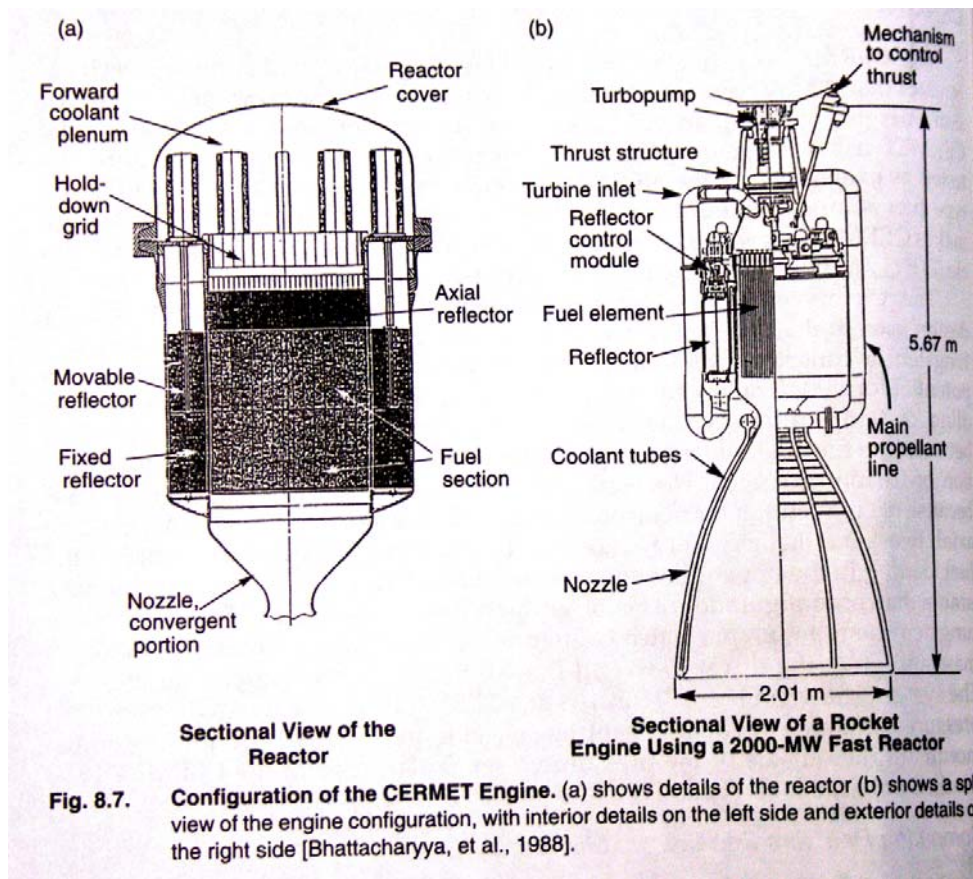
Configuration of the CERMET Engine. (a) shows details of the reactor (b) shows a split view of the engine configuration, with interior details on the left side and exterior details on the right side [Bhattacharyya, et al., 1988].
